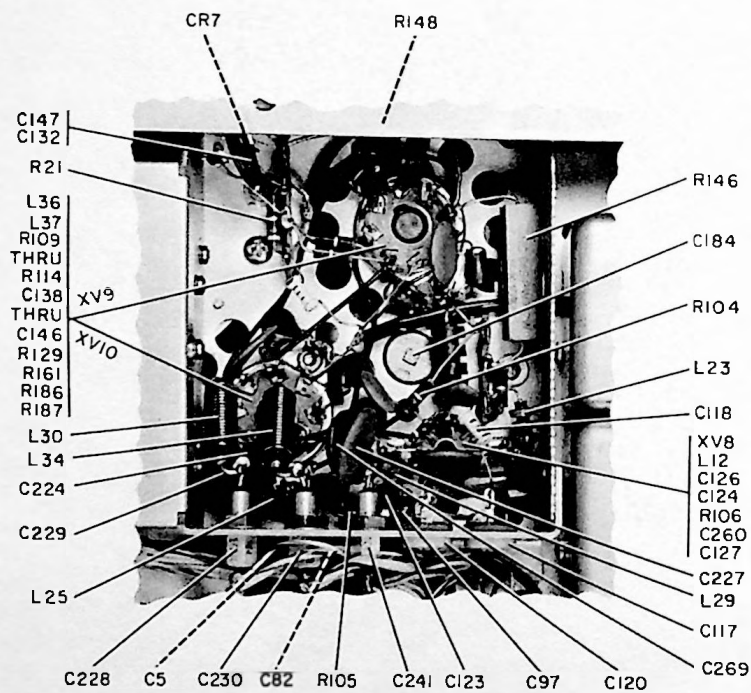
PA Grid Compartment, Bottom View, Parts Location
